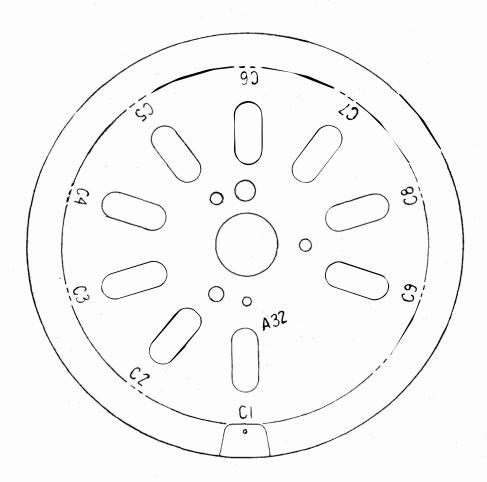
10 kHz Rotor Subassembly A2A4A32, Component Locations
